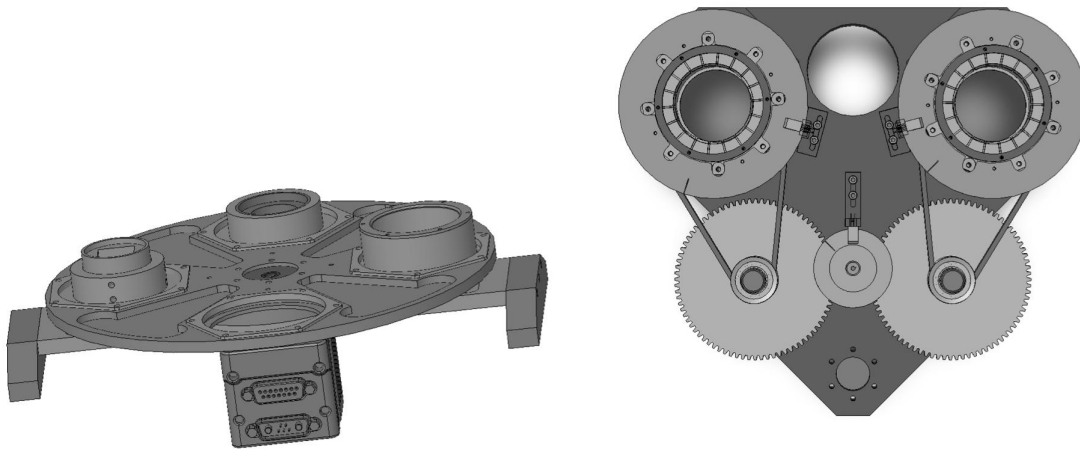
Detailed view of some mechanical parts. (Left) Calibrating wheel. (Right) Retarders support.
